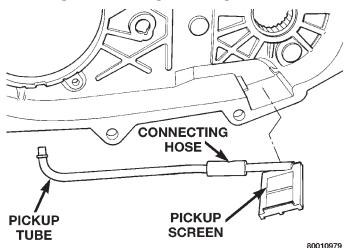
Oil Pickup Screen, Hose And Tube Removal
